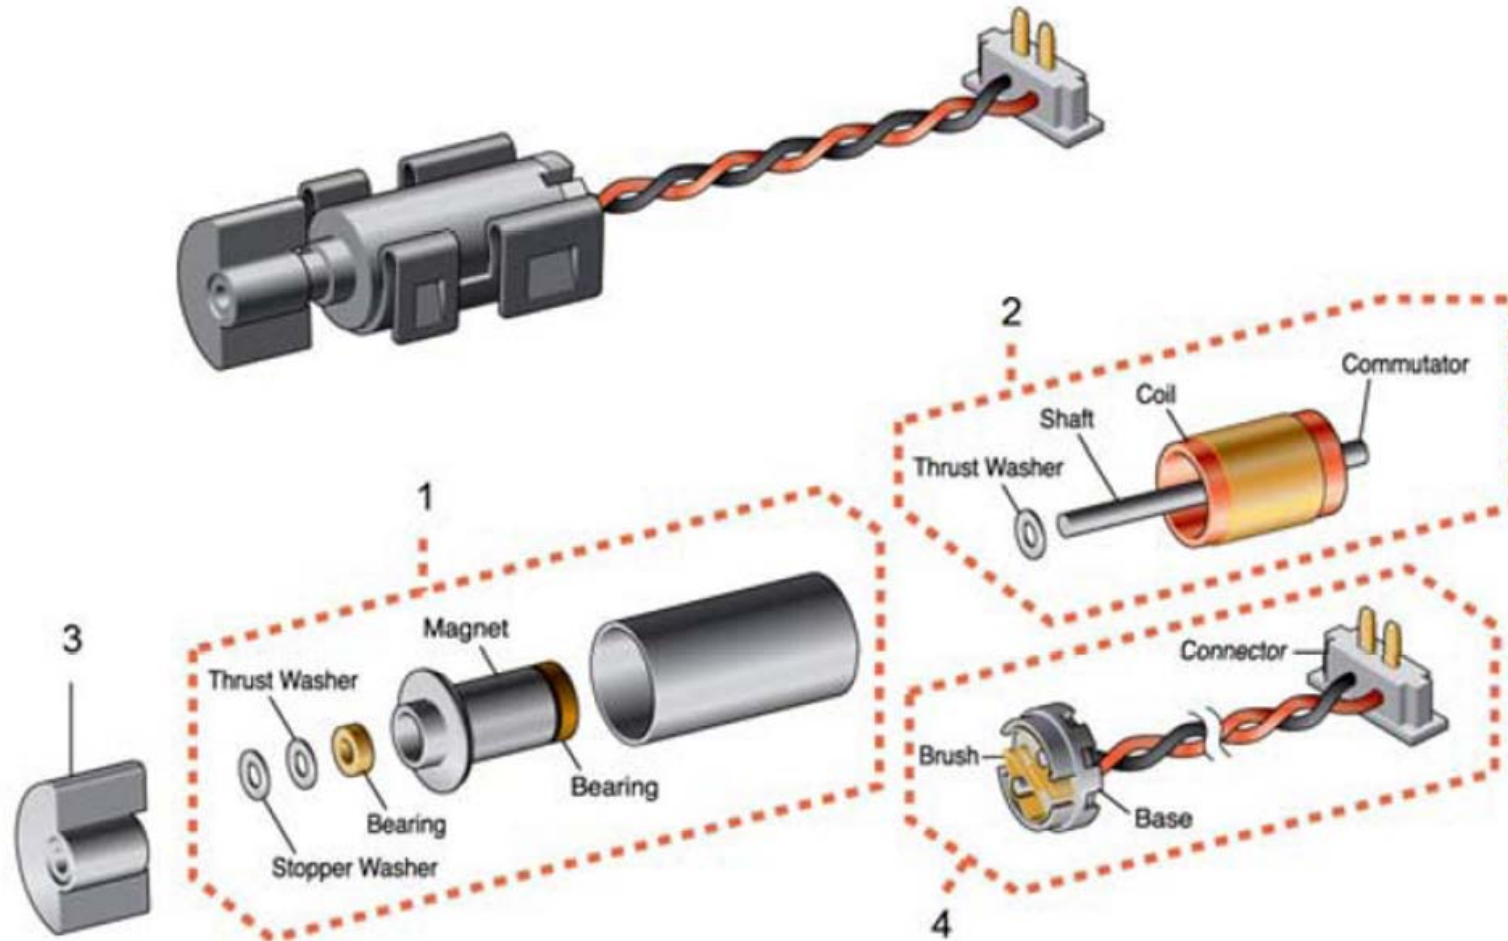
Brush type PM vibration motor of cylindrical construction: 1 — stator assembly, 2 — rotor assembly, 3 — counterweight, 4 — brush assembly. Courtesy of *Samsung Electromechanics*, Suwon City, Gyeonggi, South Korea.
